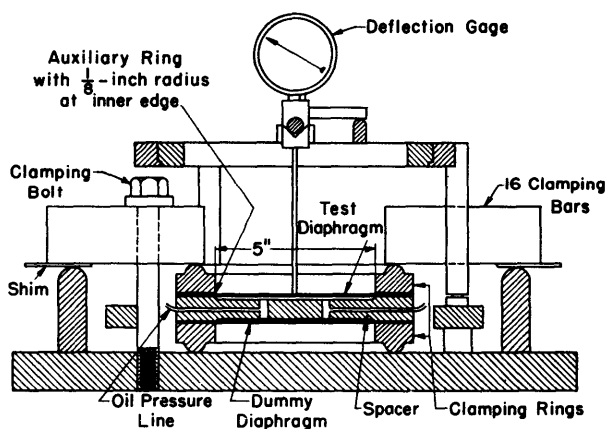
Sketch showing Fixture for Testing 5-inch Diaphragms
